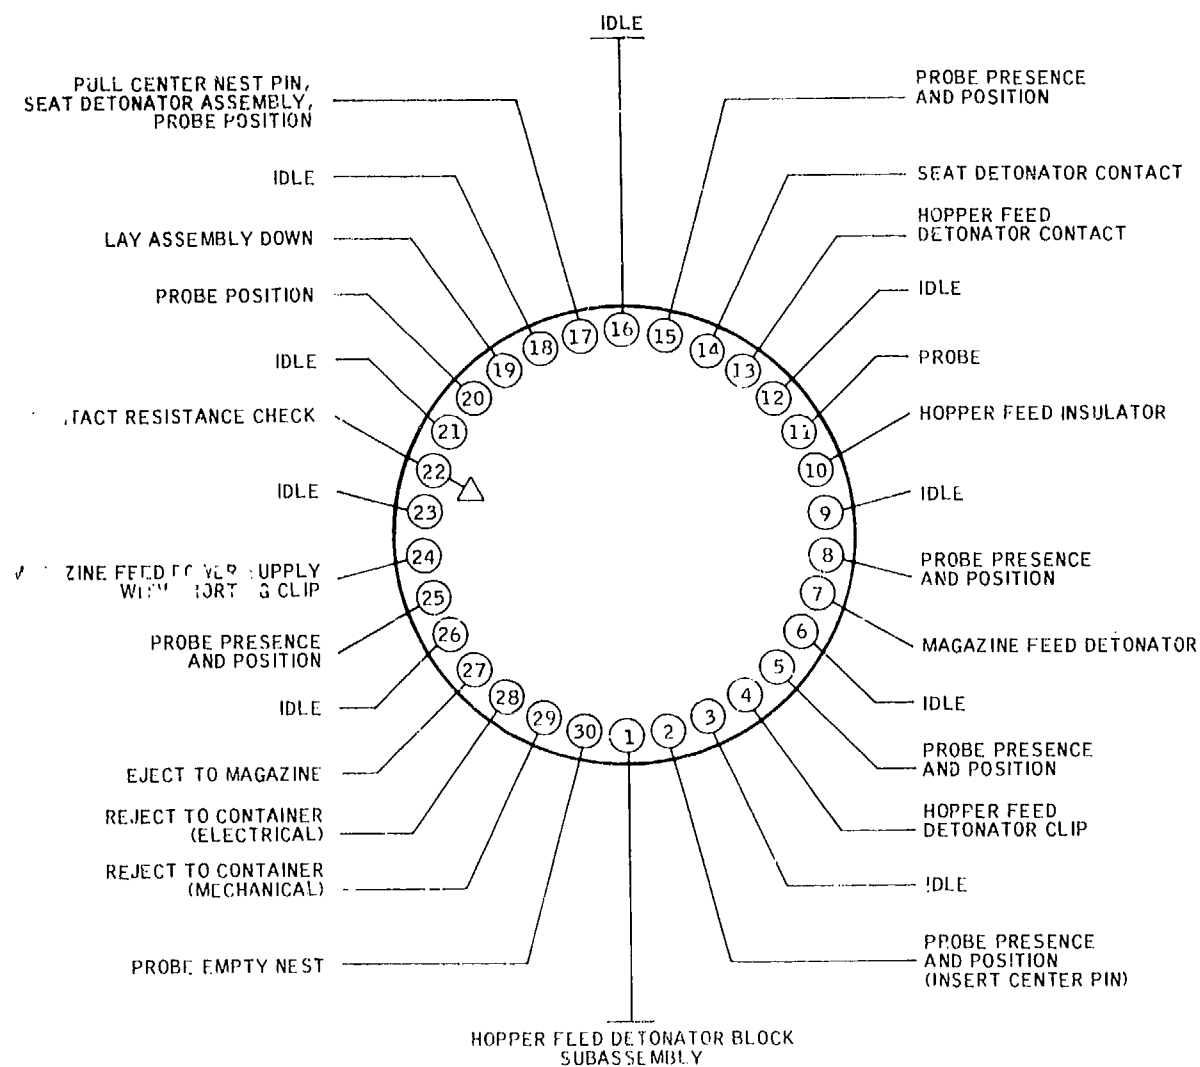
Dial schematic, machine F2 - detonator block assembly operation 2
